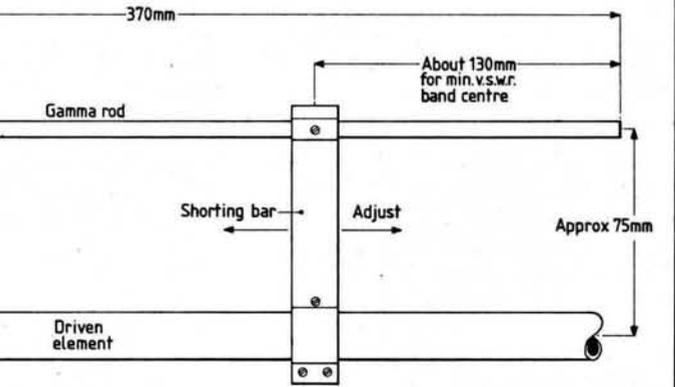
Suggested constructional details of the gamma match section and tuning capacitor housing (plan view) (see text)
